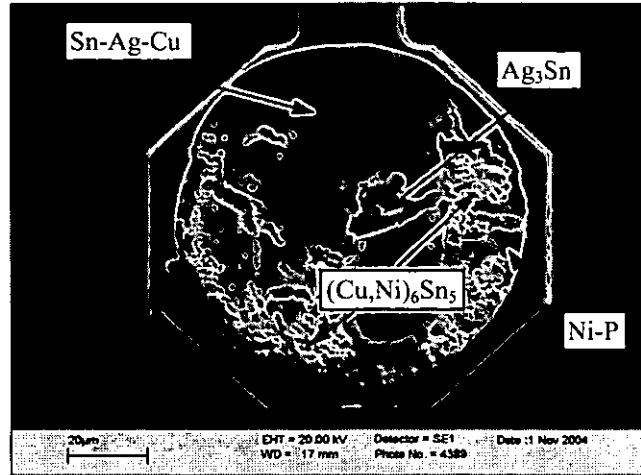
solder bump as reflowed failed at the interfaces and bulk solder (shear height 10 μm).
